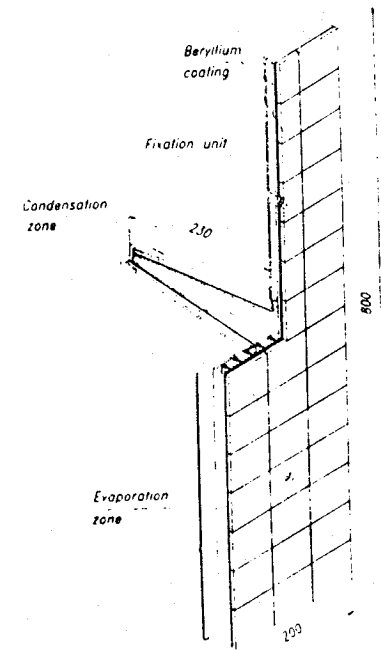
First wall panel with heat pipes (vapor chamber first wall).
